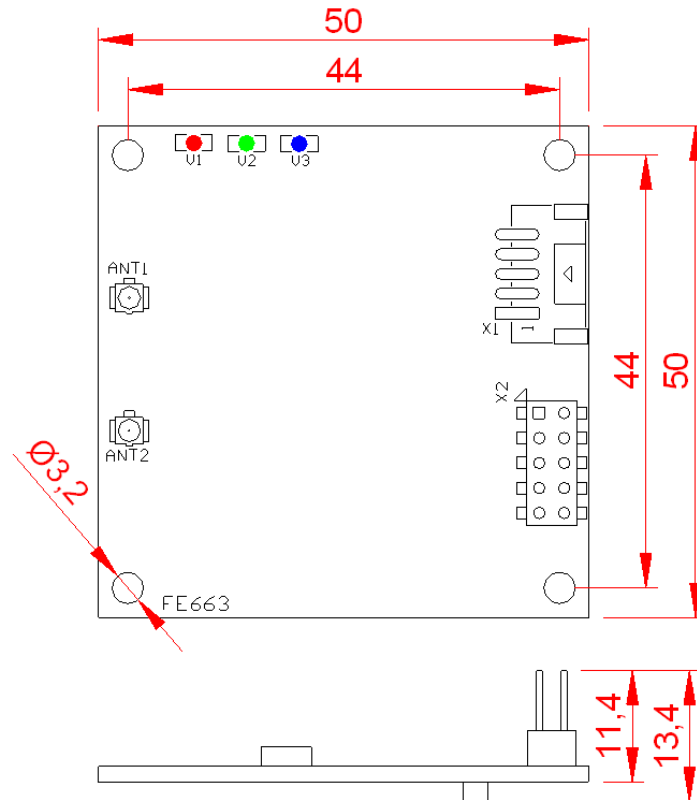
Dimensions of the ID ISC.MU02.02 Reader Module in mm
